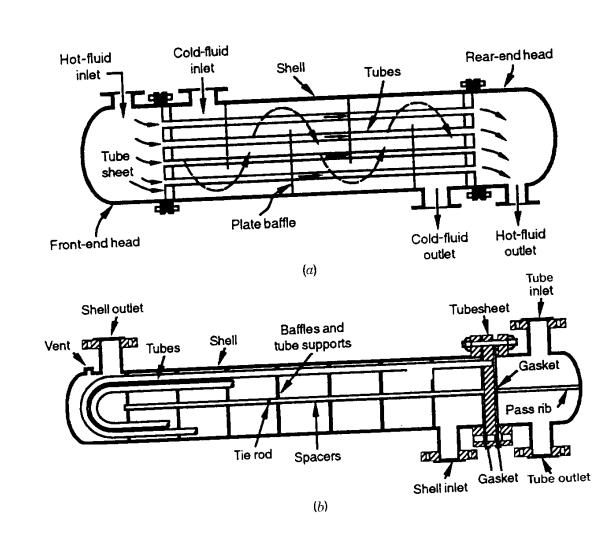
(a) Shell-and- tube exchanger with one shell pass and one tube pass;
